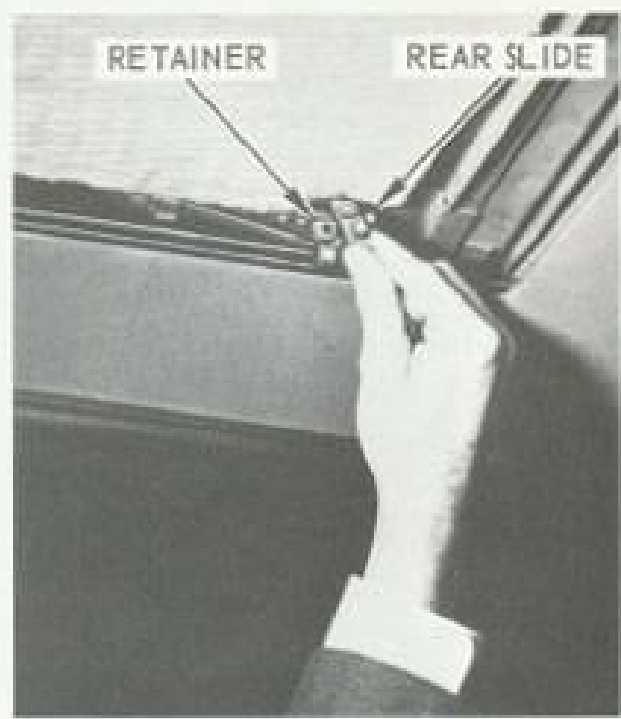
Rear Slide and Cable Assembly Removal Out of Retainer
